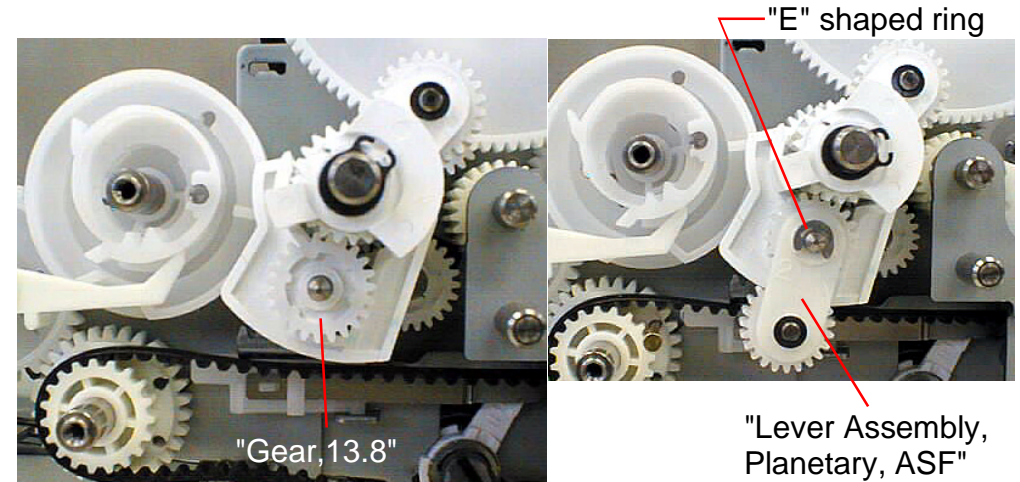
Installing "Lever Assembly, Planetary, ASF"
